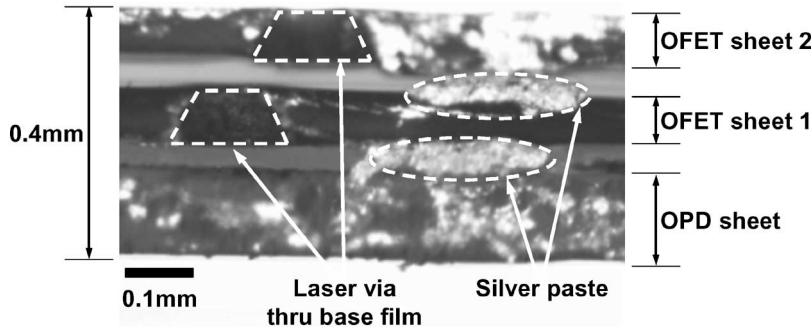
Cross-sectional photograph of sheet-type scanner.
